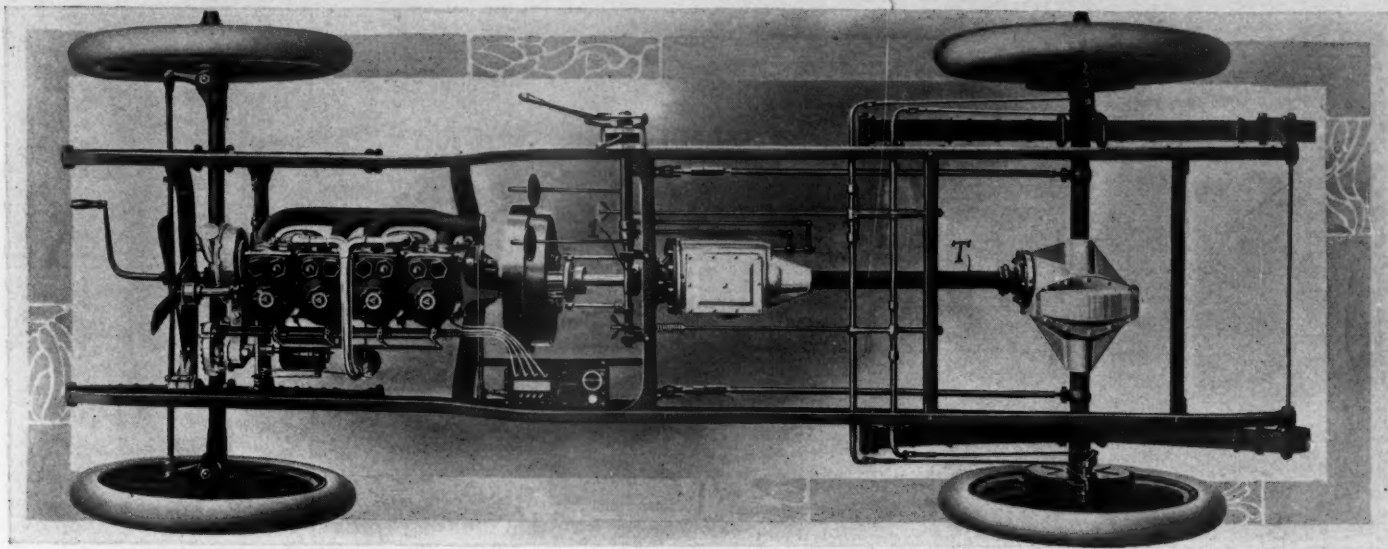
THE RAMBLER IN A UNIQUE TWO-UNIT TYPE OF CHASSIS
